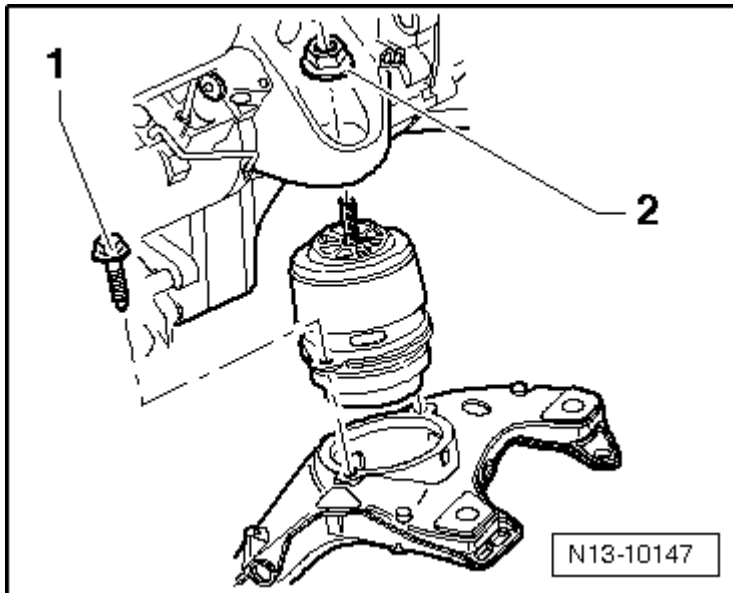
Identifying Nuts On Engine Mount At Left And Right Engine Supports
